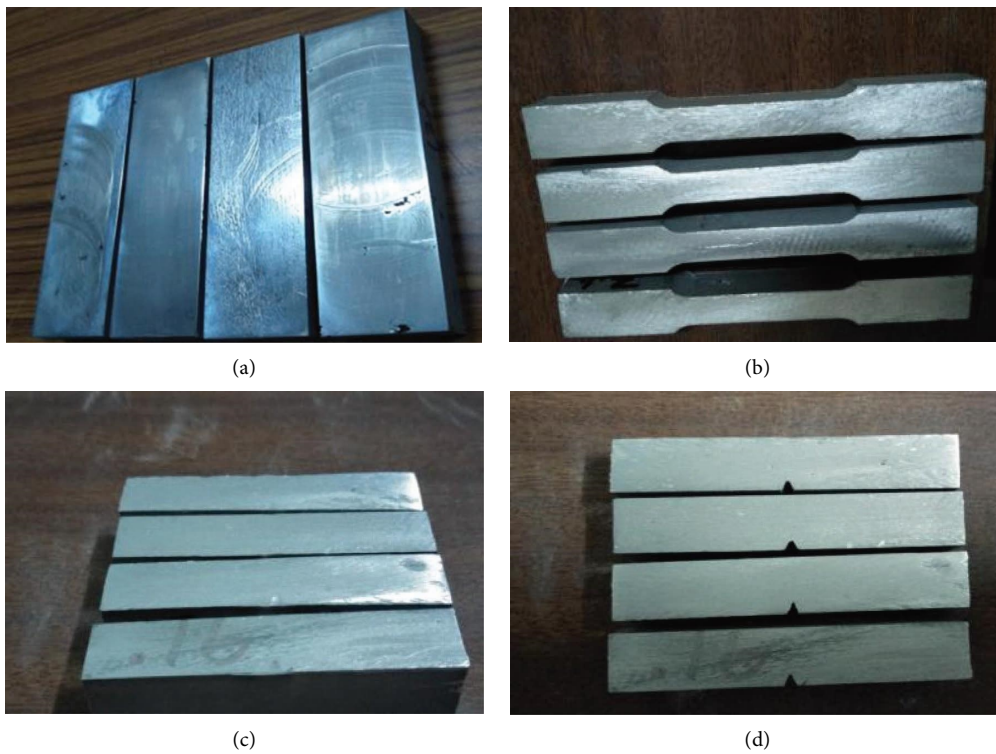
Test samples. (a) Stir cast samples. (b) Tensile samples with ASTM E08-8. (c) Flexural test with ASTM A 370. (d) Charpy impact testing machine with ASTM E23.
